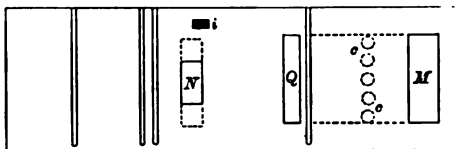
Otto Engine—Vertical View of Slide Valve.
